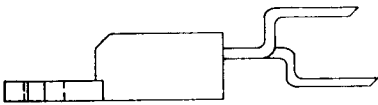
Method of configuring VERSAWATT transistor leads for connection to printed circuit boards and to provide relief in mounting arrangements in which forces are imposed on the package leads.
